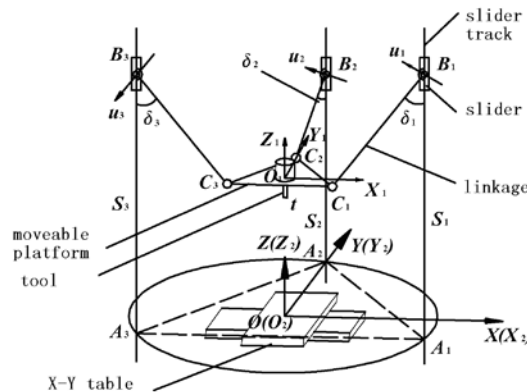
Coordinate system of PRS-XY hybrid machine tool.
